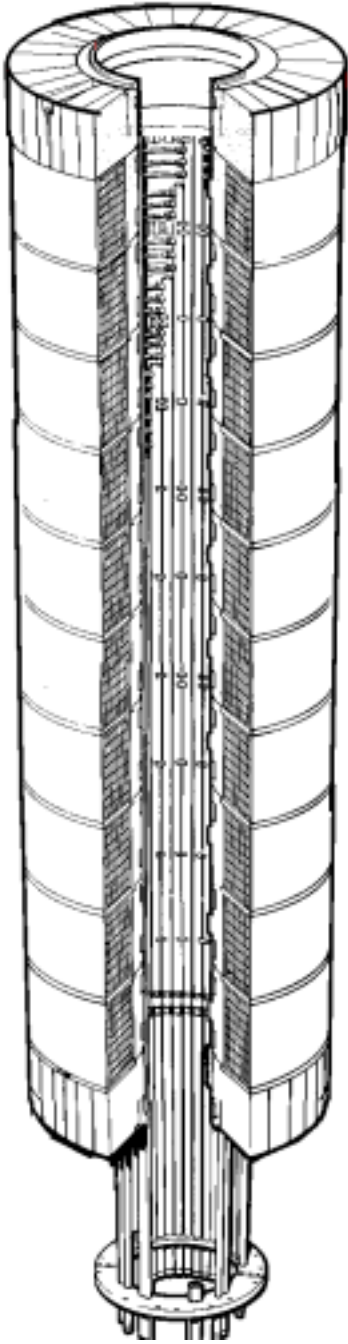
P1 coil assembly, showing 10 coils, upper ring and lifting ring
